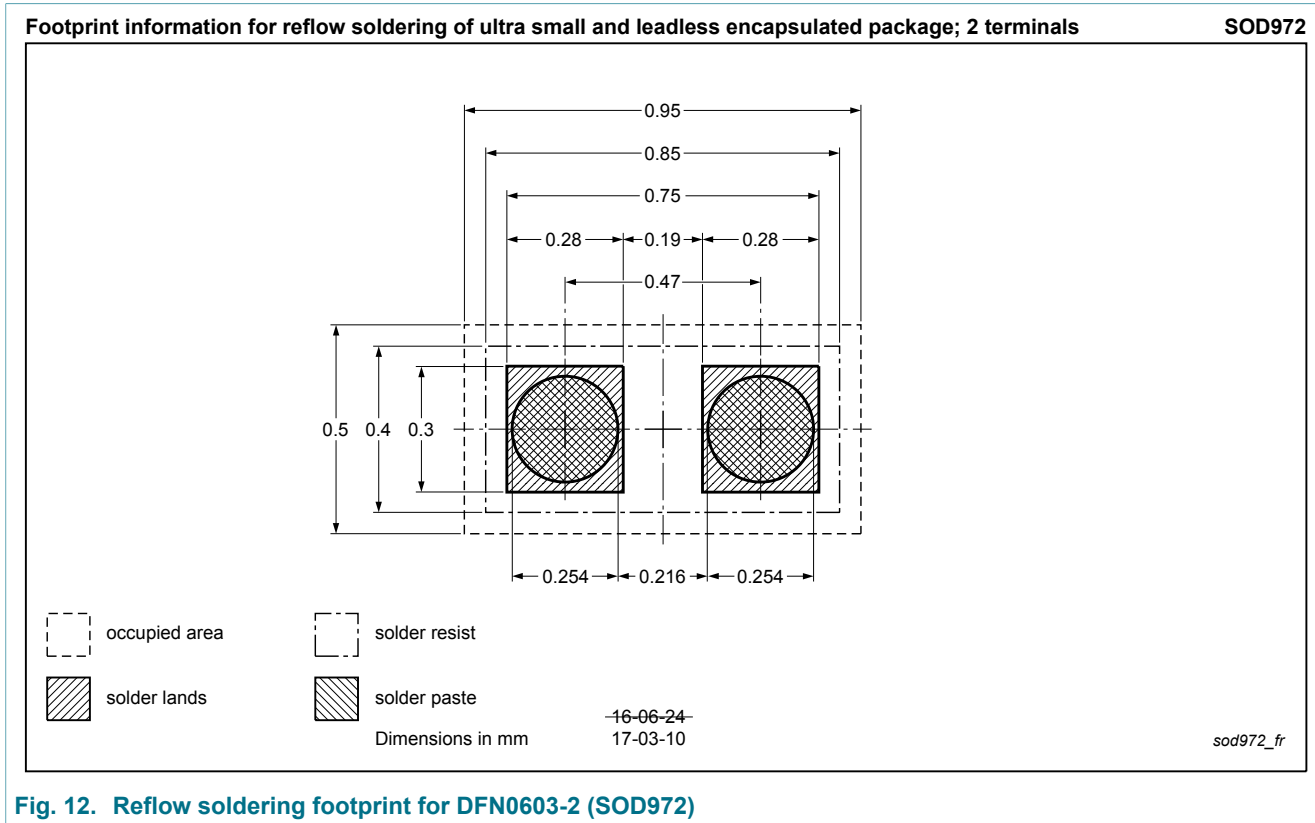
Reflow soldering footprint for DFN0603-2 (SOD972)
